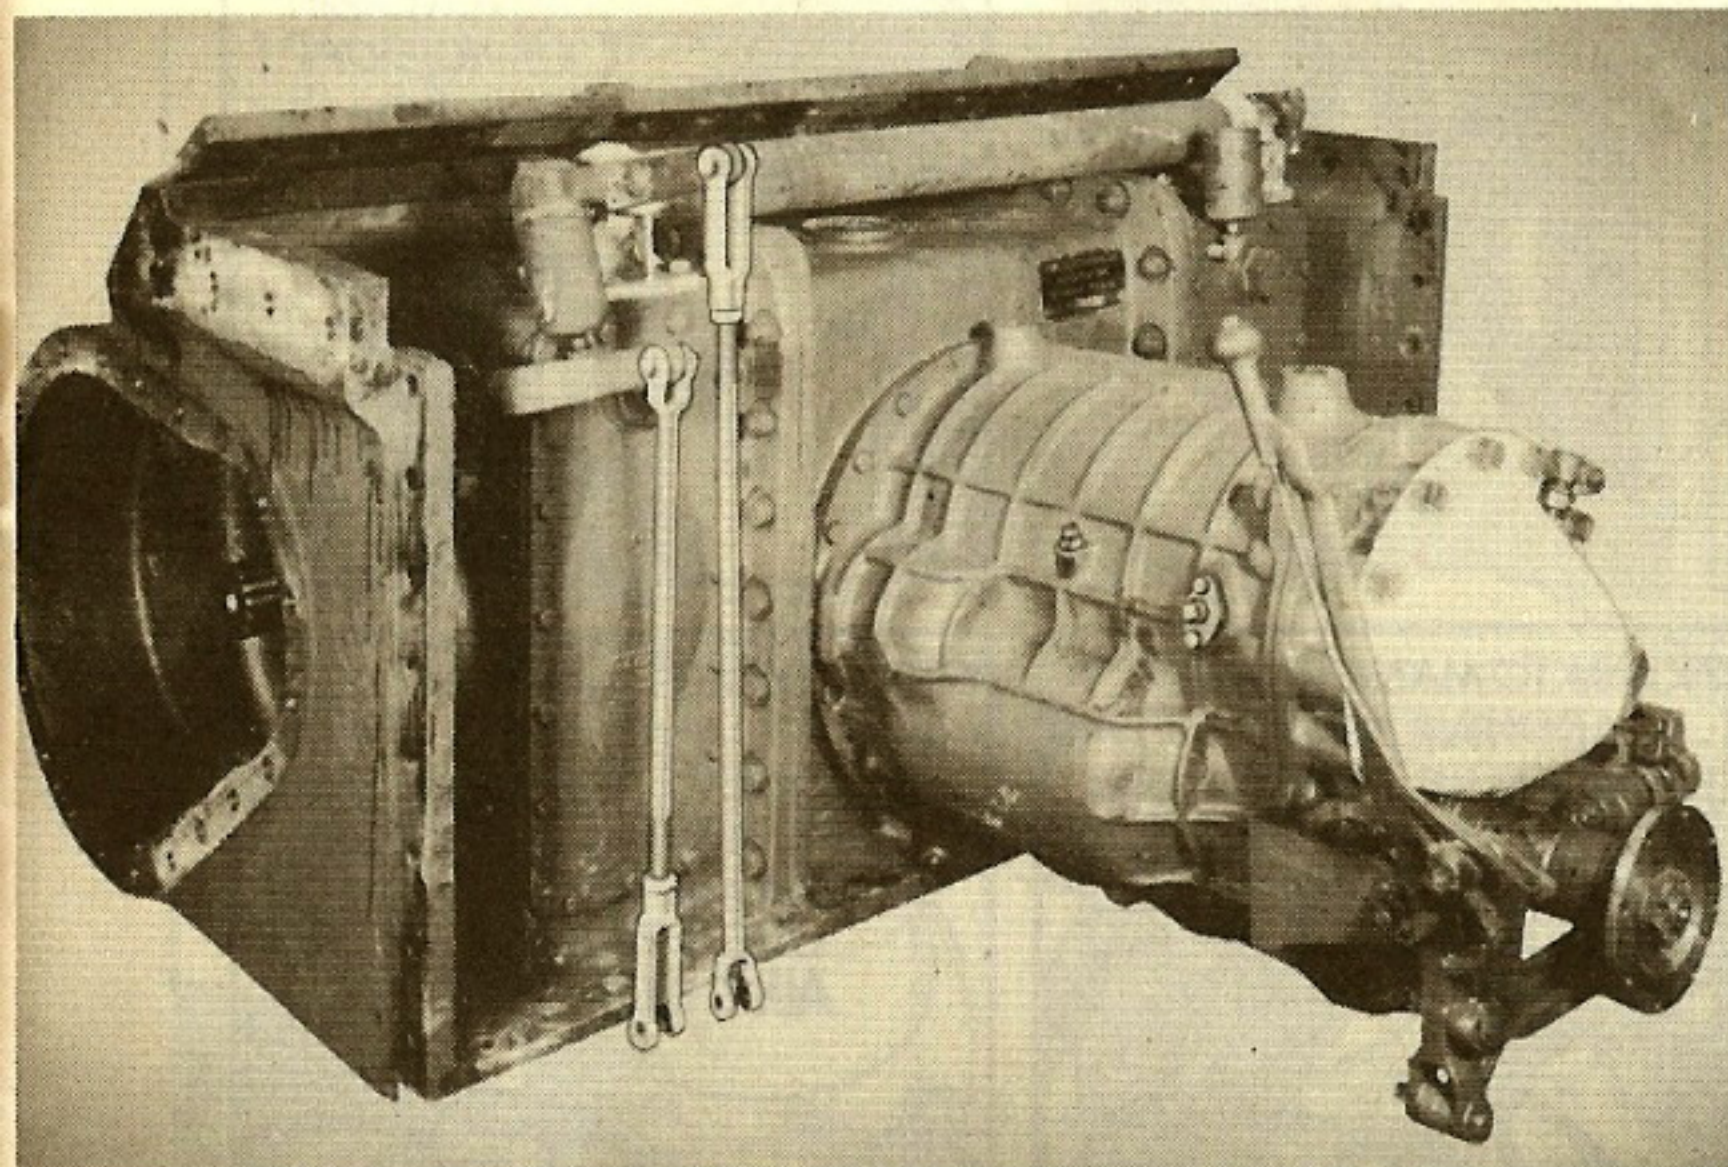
The 3-piece housing, single-anchor-brake type, is partial to pull-type steering-brake operating-rods.
